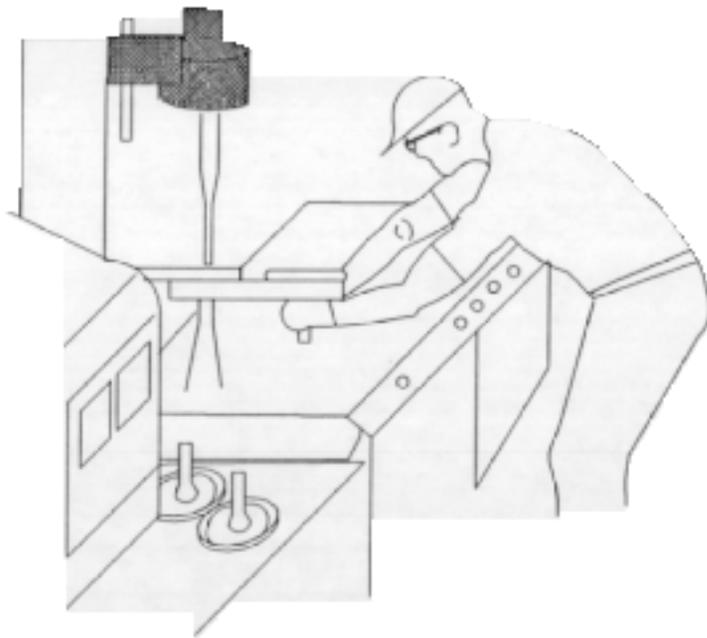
Plan View of FL Flywheel Milling Machines and Milling Process.
